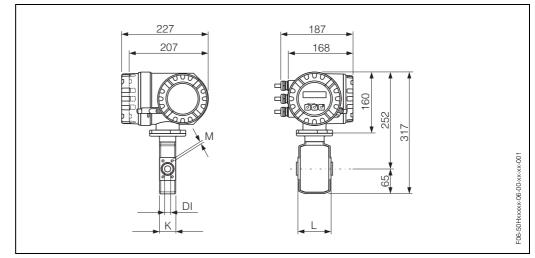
Dimensions Promag H / DN 2...25 (compact version, aluminum field housing)
